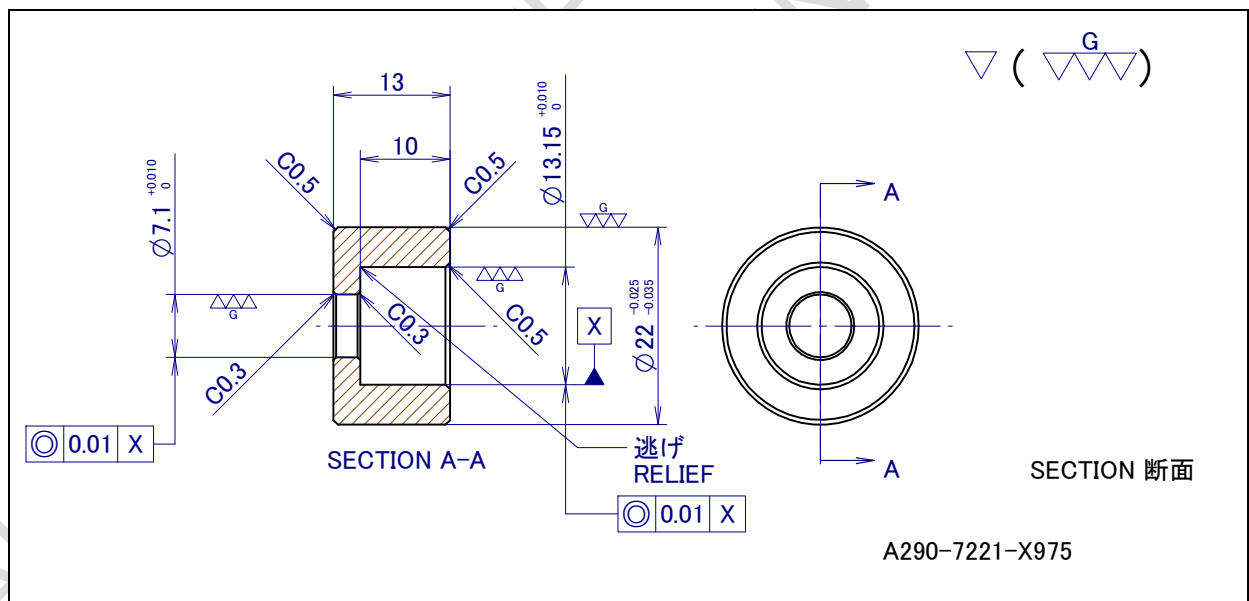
(j) Mounting fixture for gear of J3-axis motor
